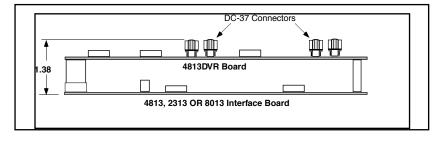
shows how a 4813 DC-37 Relay Driver Board mounts on any standard 4813, 2313 or 8013 Board. The 4813 DC-37 Relay Driver Board is positioned over J1 on the xx13 Board and pressed into place. A pair of 0.750 high female-to-male standoffs holds the front portion of the two boards together.
